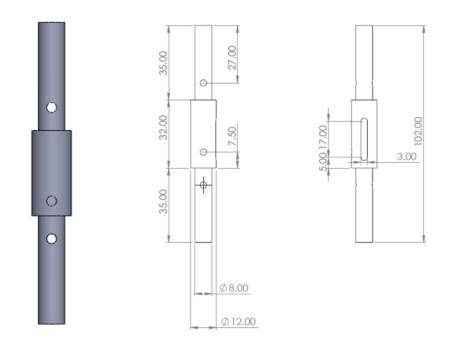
CAD model and dimensions of Arm 2 worm shaft
